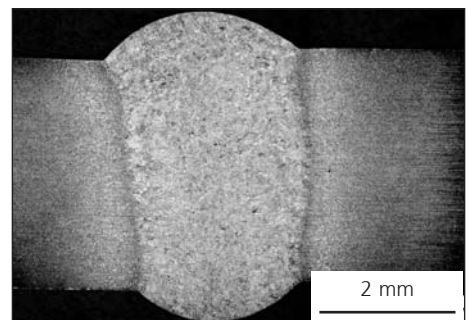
Deep welding with filler, Cr-Ni-steel, 3mm-sheet, feed rate 120m/min
